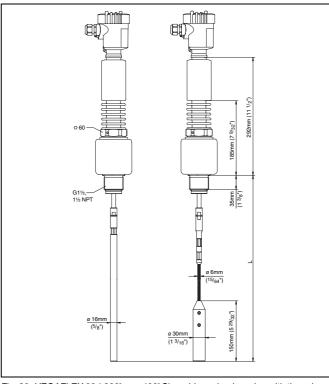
VEGAFLEX 66 (-200° ... +400°C) - cable and rod version with thread
